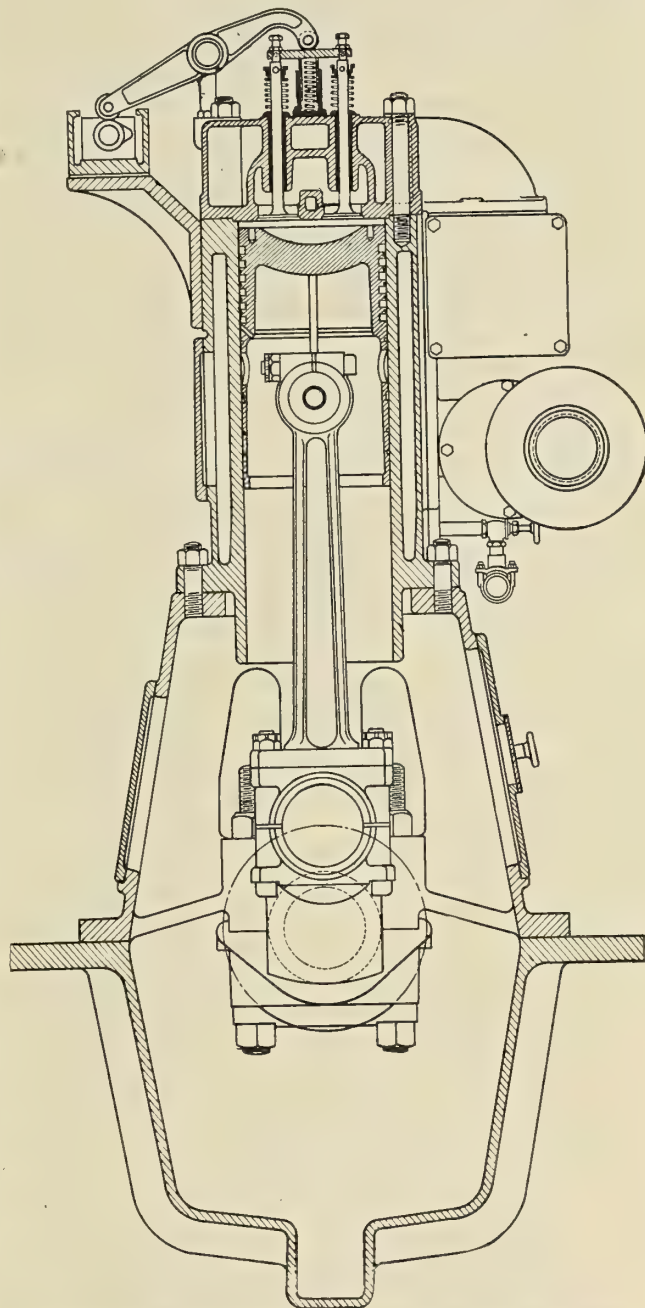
Sectional View of Cylinder and Details of Fuel Injection
